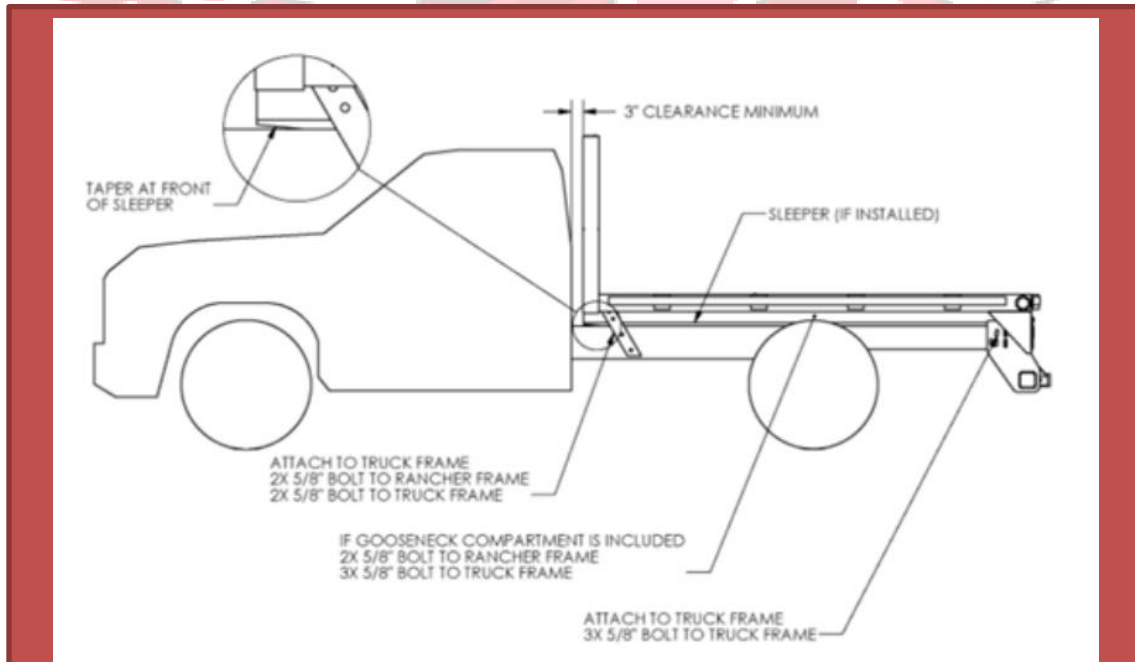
Installation to Truck Body. Cab to Bulkhead Spacing (3" Minimum)
